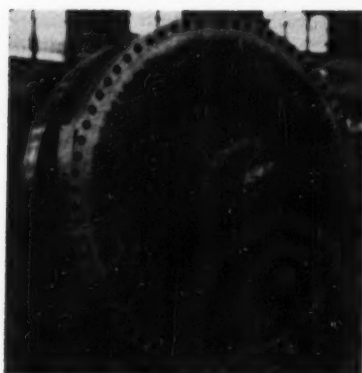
Heat exchanger containing Type 304 tubes heliarc-welded to a Type 347 tube sheet
